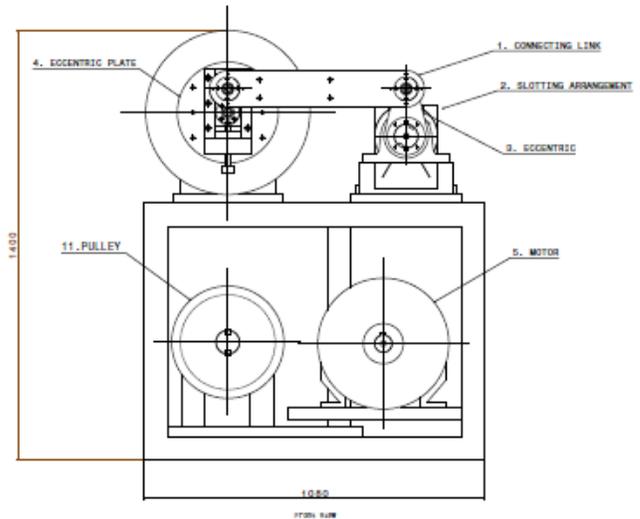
Schematic diagram of Coupling Torque Endurance Test Machine.
